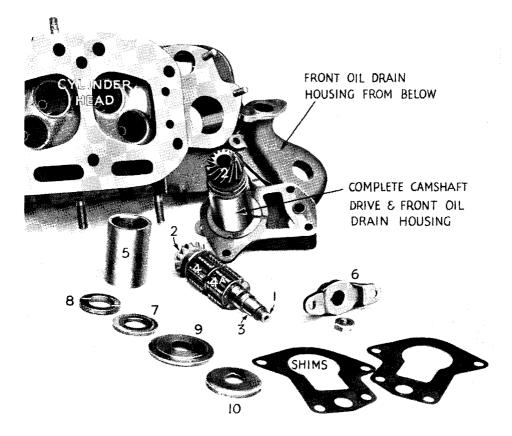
Illustration No. 40 .--- View of the underneath side of the cylinder head, with complete camshaft drive removed. A separate unit has been dismantled, the parts being as follows :-
